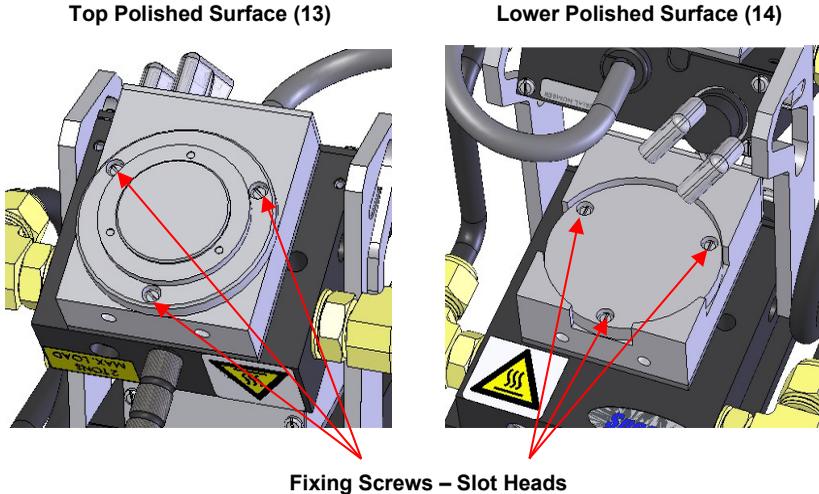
Top and Lower Polished Pressing Surfaces Fixing Screws
